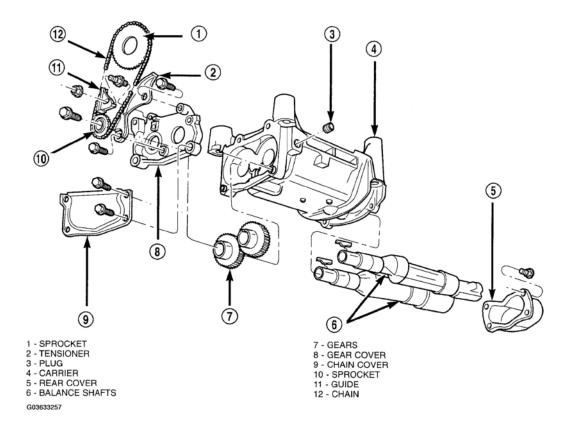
Identifying Balance Shafts And Carrier Assembly Courtesy of DAIMLERCHRYSLER CORP.
